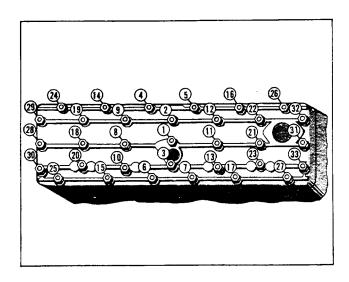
Cylinder Head Stud Nut Tightening Sequence
